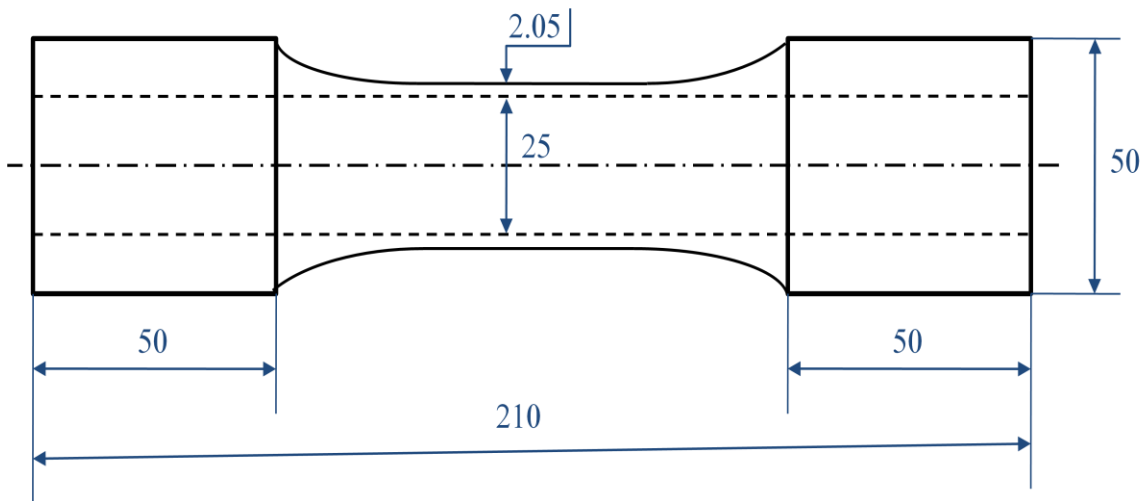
Geometry and dimensions of Inconel 718 tubular specimens [87]. All dimensions in mm
